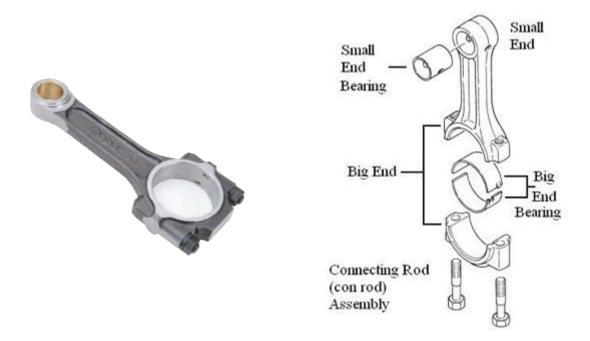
Connecting Rod assembly with press fitted brass bush, Cap, Nuts and Bolts
